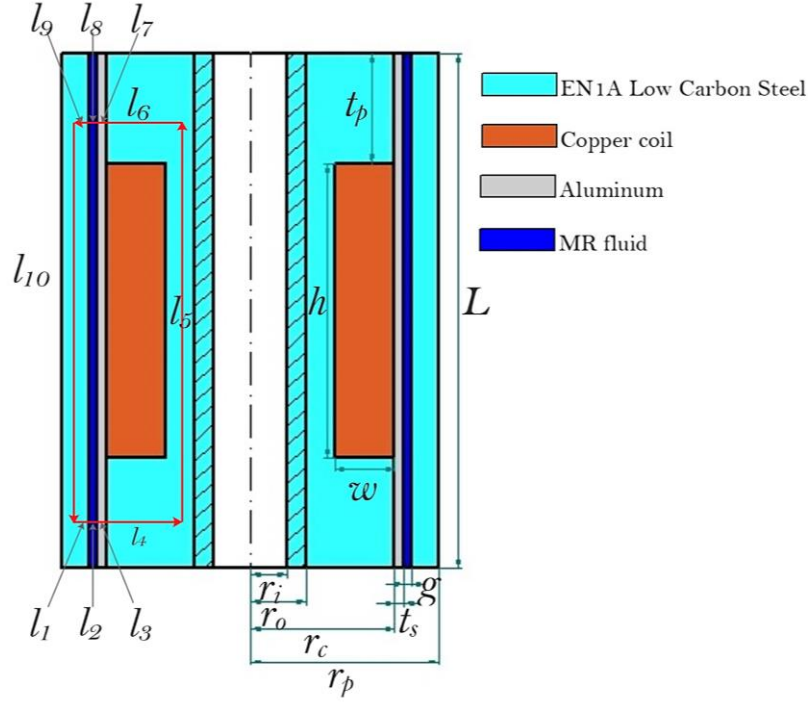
Sketch of the cross section of the piston assembly of MR damper showing the magnetic circuit and terminology
